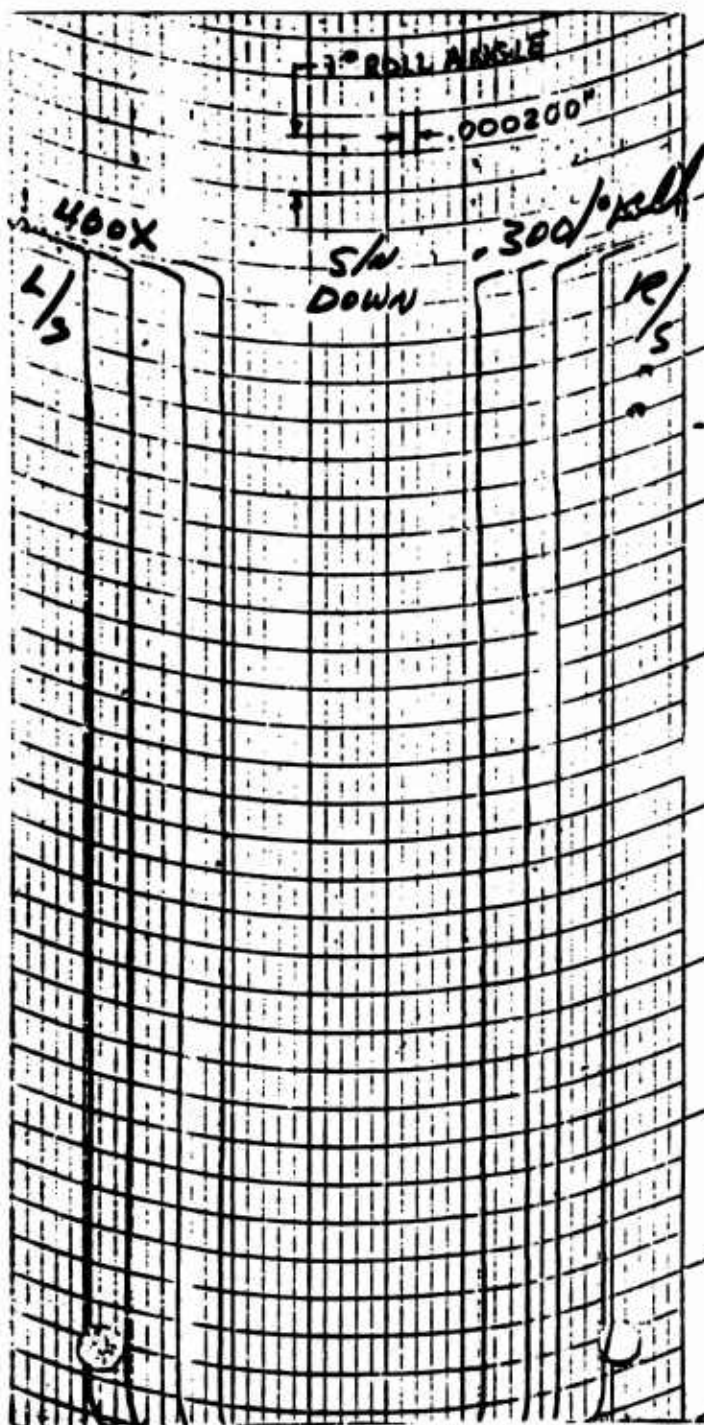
Gear Tooth Profile Measurements on the Planet Gear.
